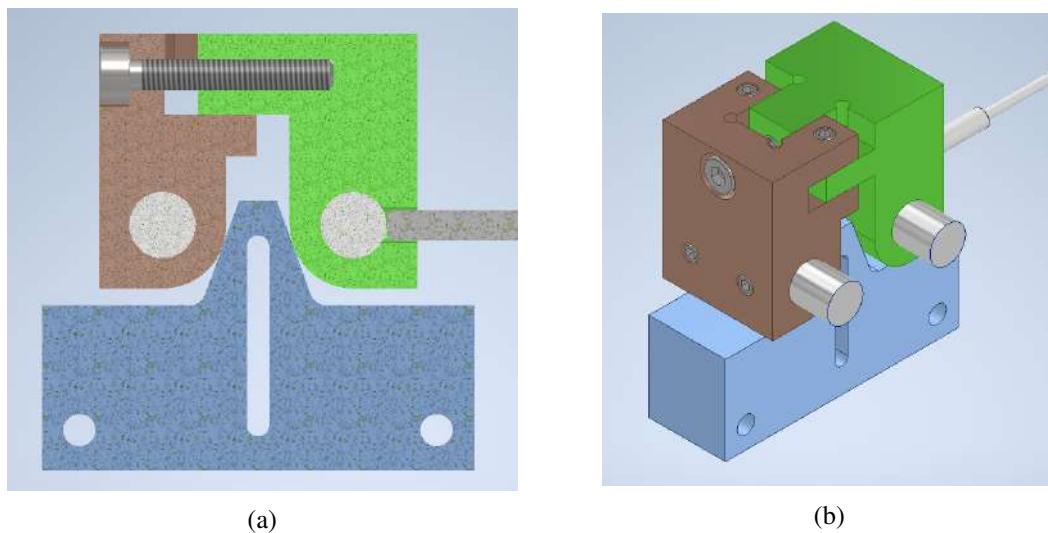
Second iteration of the two heaters and hybrid gear tooth assembly
